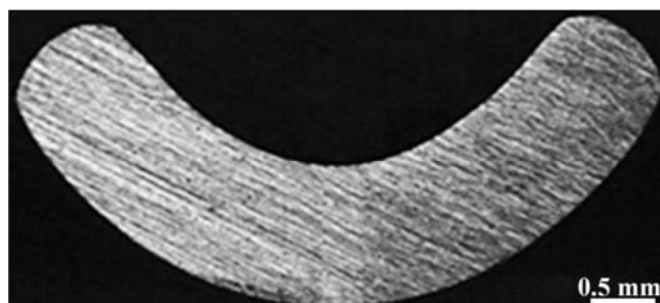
Macro-section of the C-Filler for the Super-TIG welding
